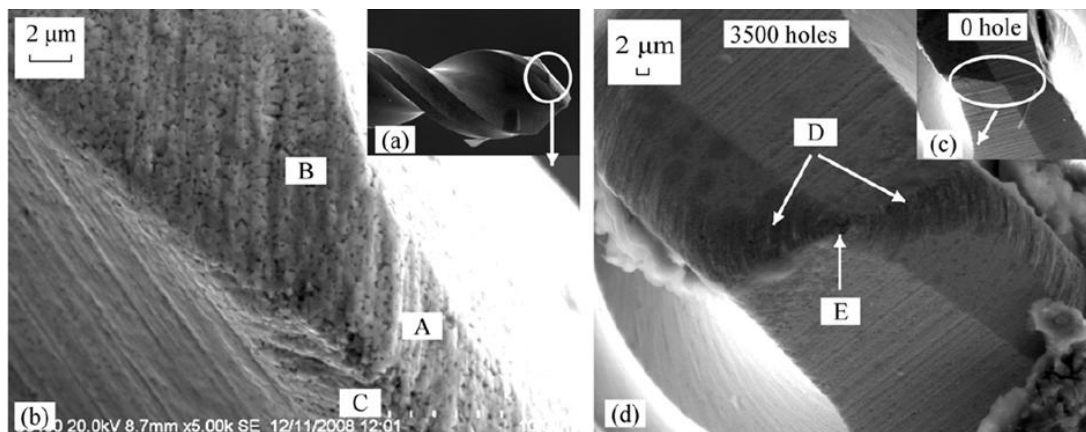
Abrasive wear after drilling holes on PCB board (Zheng et al., 2016).
